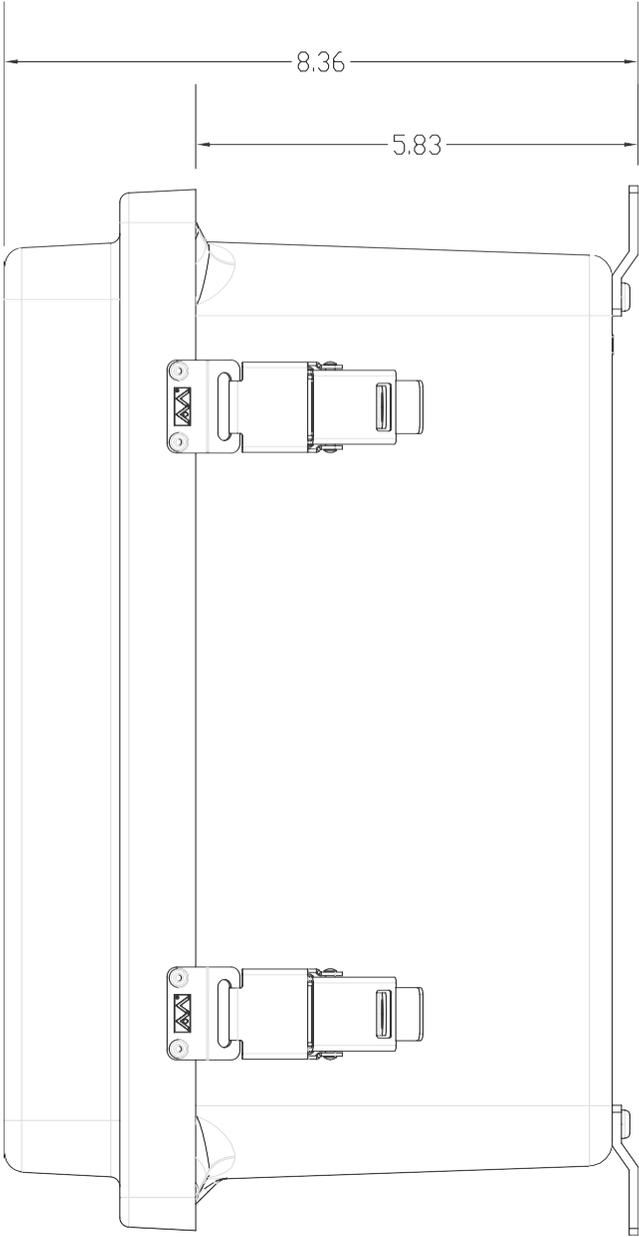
NEMA 4X Enclosure Side Dimensions
